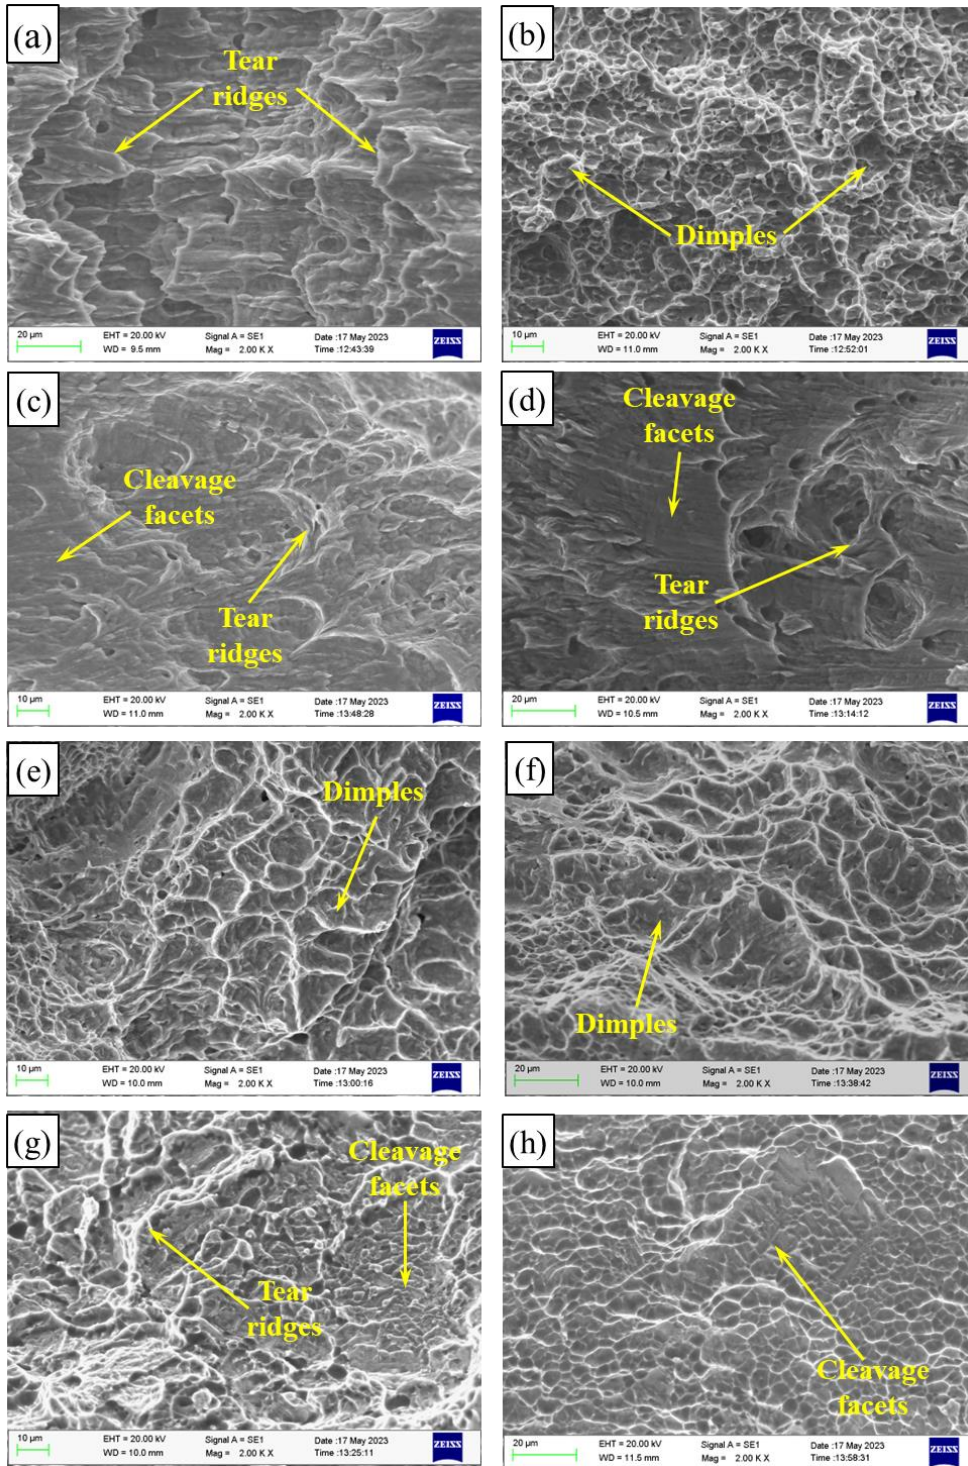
SEM micrographs of fractured impact test specimens of as-received base materials and dissimilar welds: (a) as-received CP-Ti; (b) as-received Ti-6Al-4V; (c) HAZ of CP-Ti side in conventional-GTAW weld; (d) HAZ of CP-Ti side in pulse-GTAW weld; (e) weld region in conventional-GTAW weld; (f) weld region in pulse-GTAW weld; (g) HAZ of side in conventional-GTAW weld; (d) HAZ of Ti-6Al-4V side in pulse-GTAW weld
